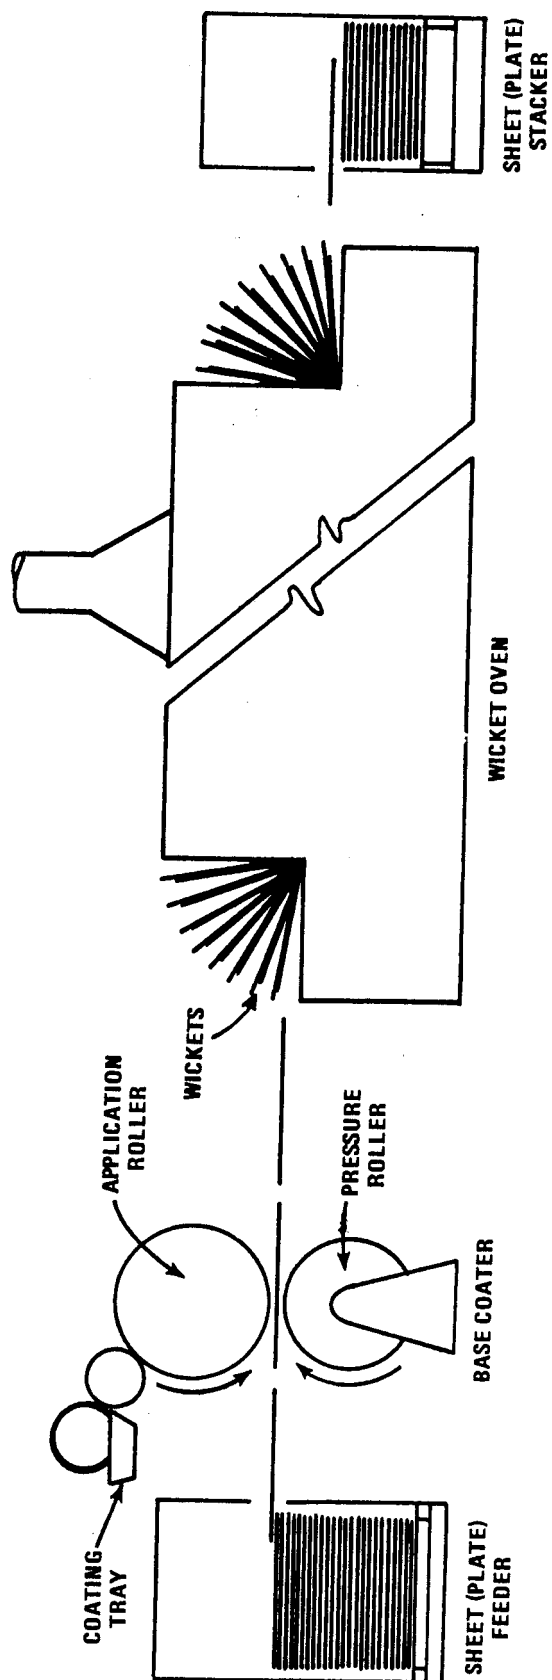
Three-Piece Can Sheet Base Coating Operation
